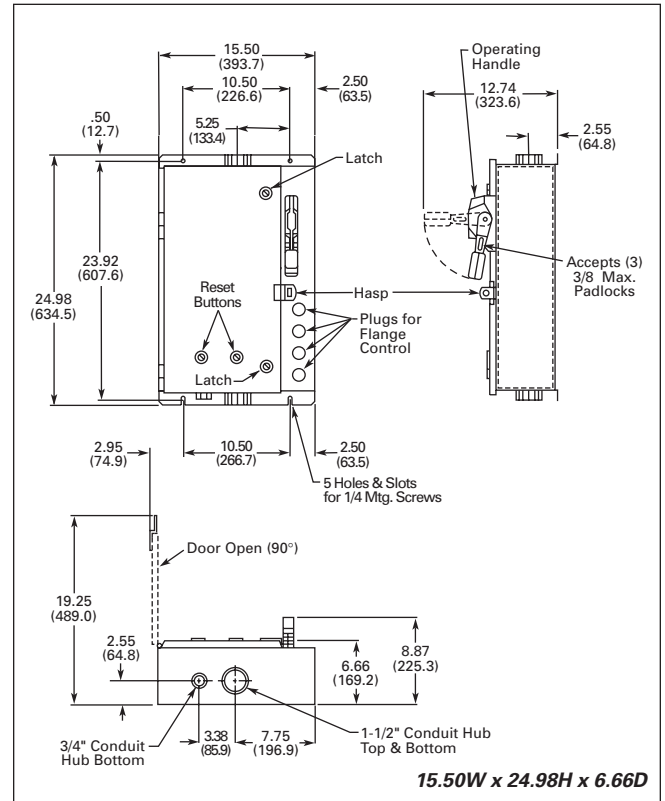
Box B, Type 4X — Approximate Dimensions in Inches (mm)
